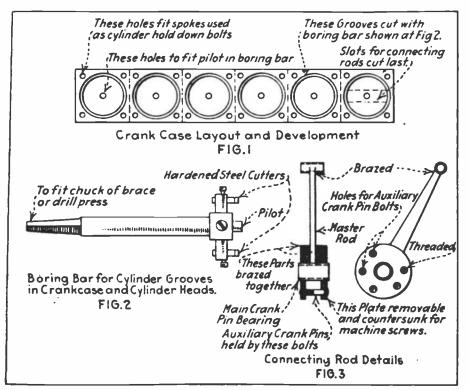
Development of crankcase. Fig. 2—Special cutter for cylinder heads and crankcase. Fig. 3—Connecting rod details showing master rod
